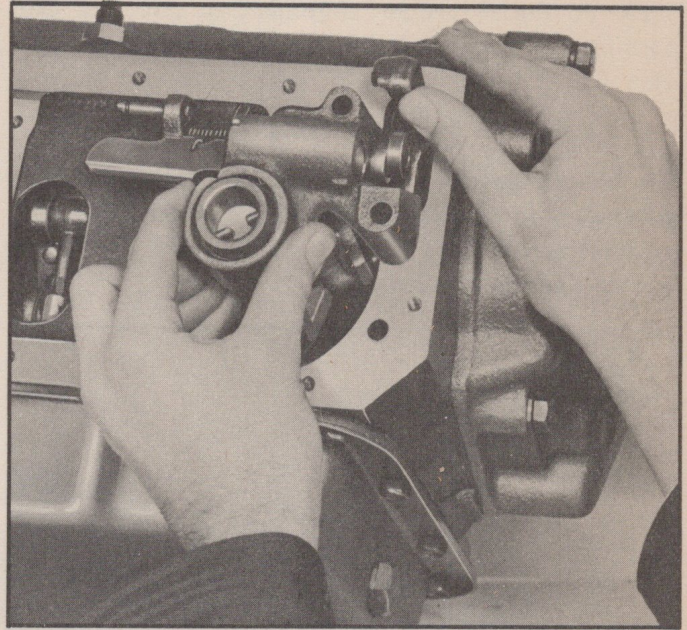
Installing Parking Brake Bracket and Parking Pawl
